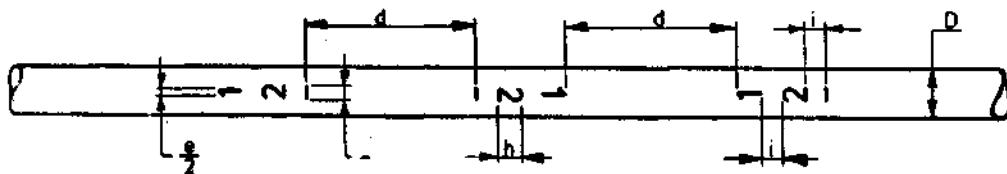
CORE IDENTIFICATION BY NUMBERS
